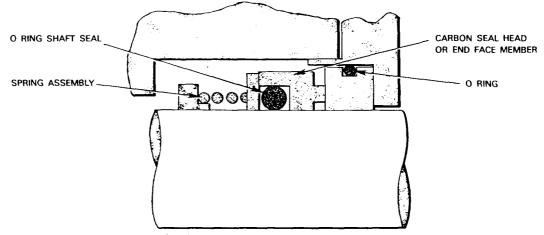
A BASIC MECHANICAL FACE SEAL DESIGN
